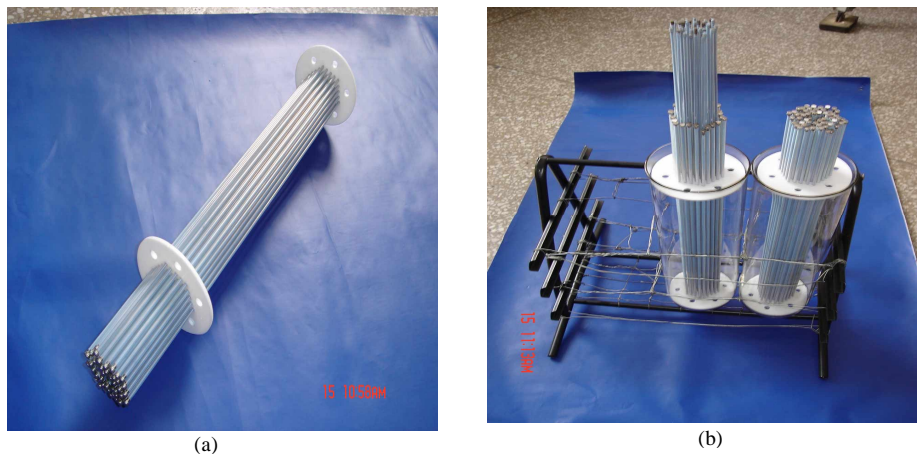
Moulds used to make the preforms: (a) a mould core and (b) two assembled moulds.
